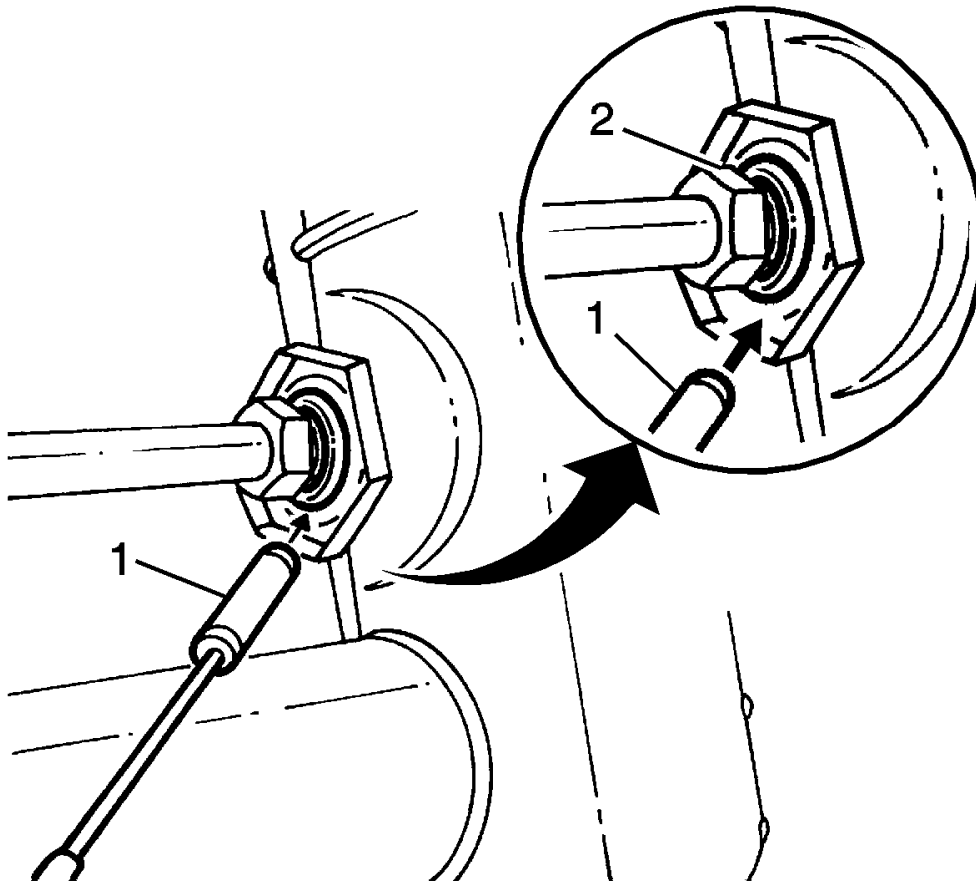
Identifying Transmission Oil Cooler Metal Composition
